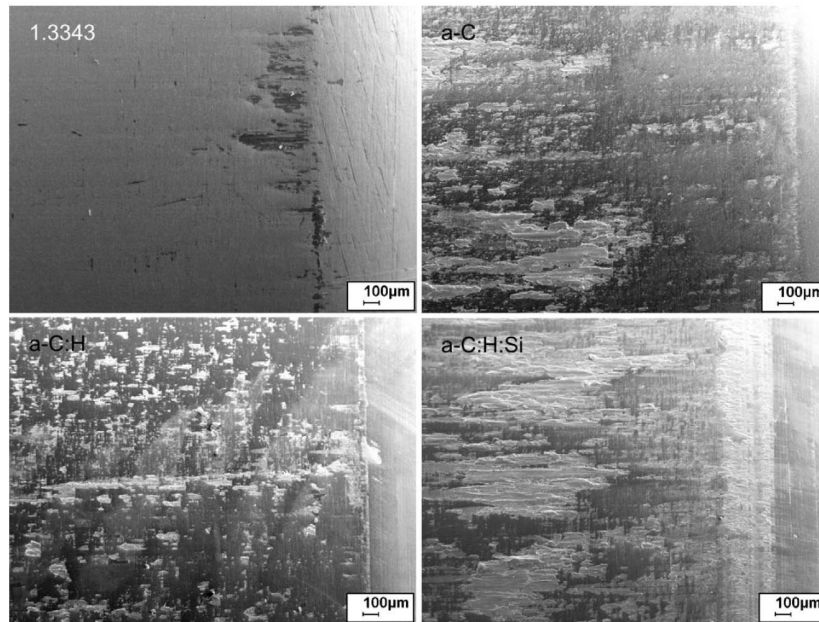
Transfer of AA6016 workpiece material to the punch tip edge [99].
